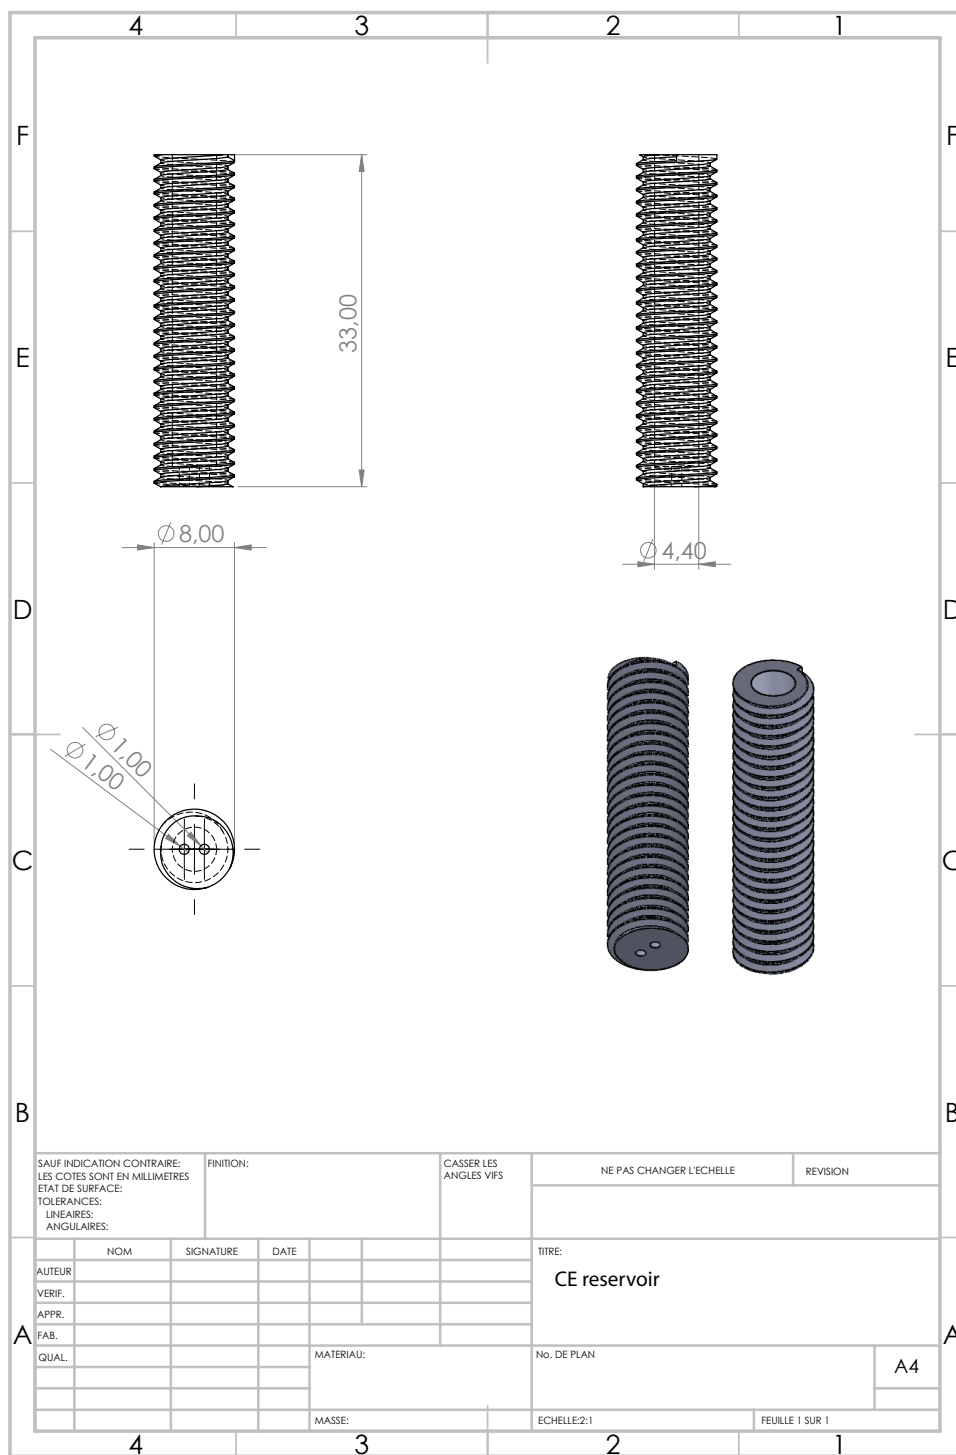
Drawing of the middle part of the mini redox-flow battery. The dimensions are in millimeters.
